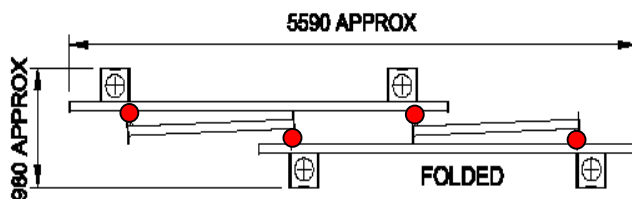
Plan view of frame folded for transit. Position of hinges in red colour.
